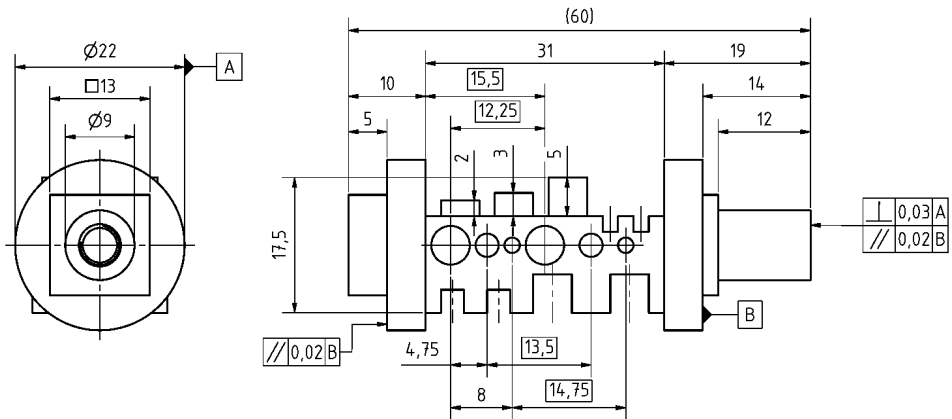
Technical drawing of the multi purpose specimen with some important features.
